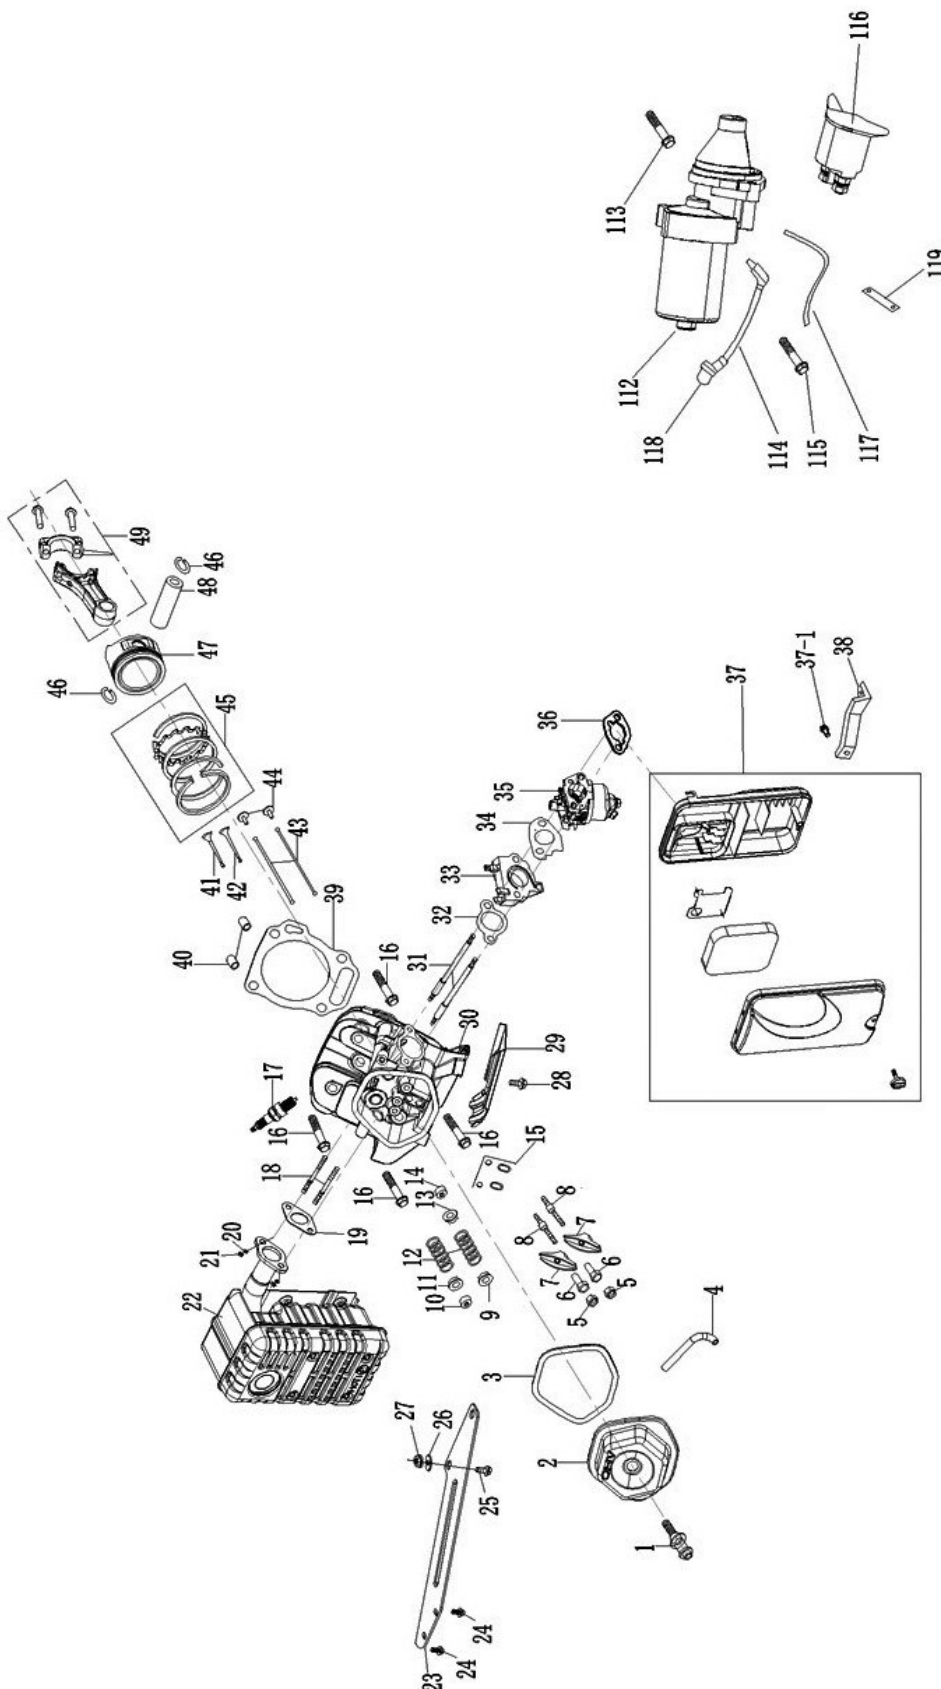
Spare parts drawing 5 PG-E 60 SEA, PG-E 80 TEA and PG-E 90 SEA
